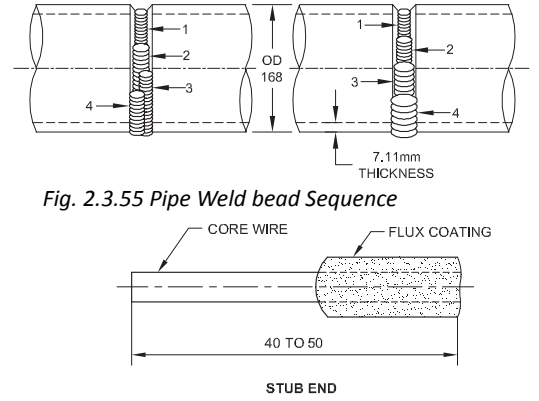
Pipe Weld bead Sequence
